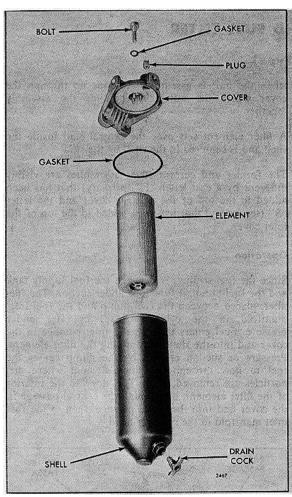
Fuel Strainer Details and Relative Location of Parts
